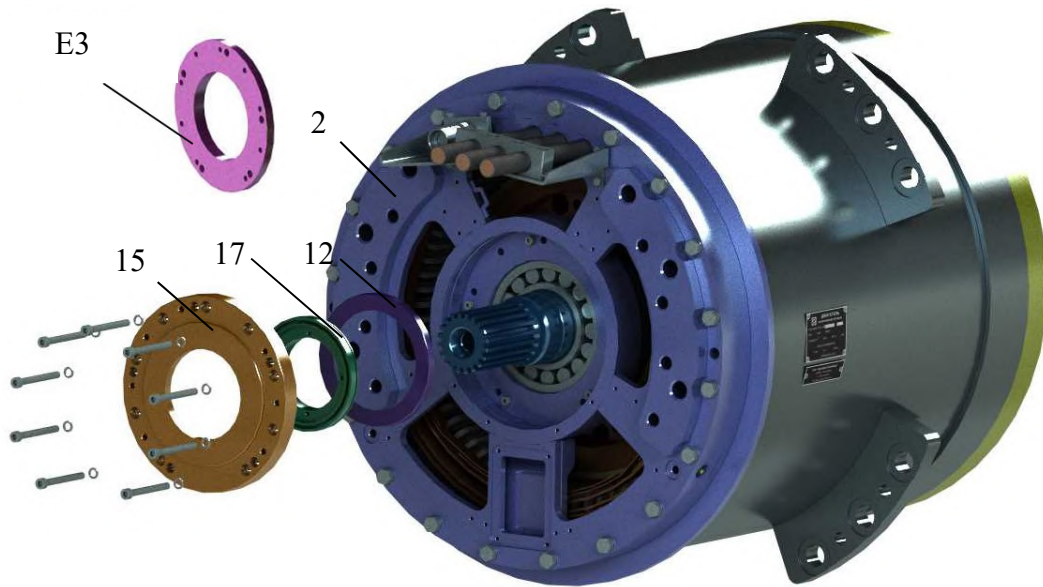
Installation of Female Labyrinth Seal, Oil Slinger and Thrust Ring on the Brake Side
